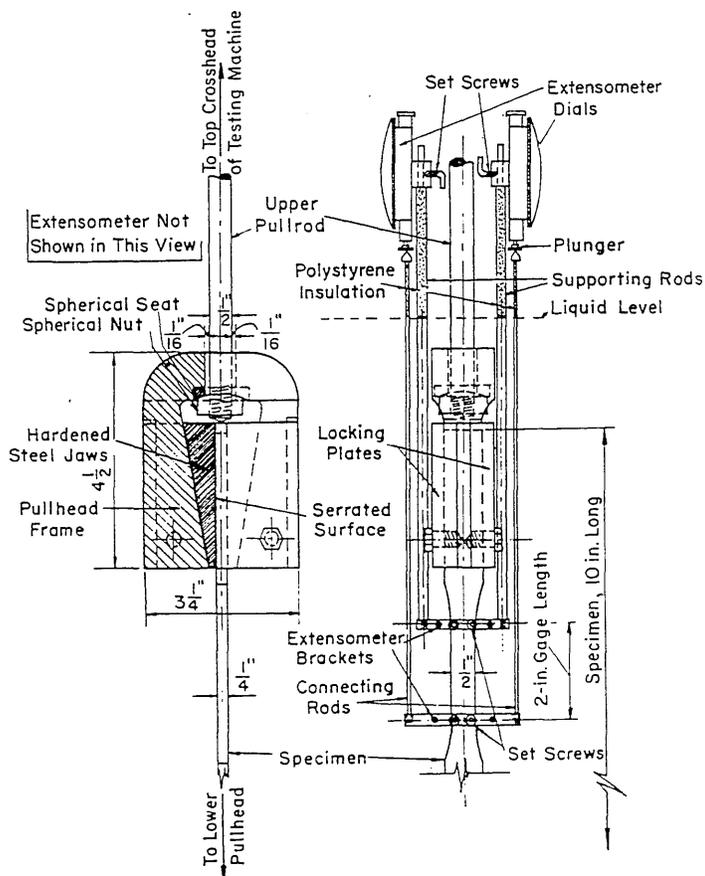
Pullhead, Specimen, and Extensometer Assembly for Tests at -321 F.
